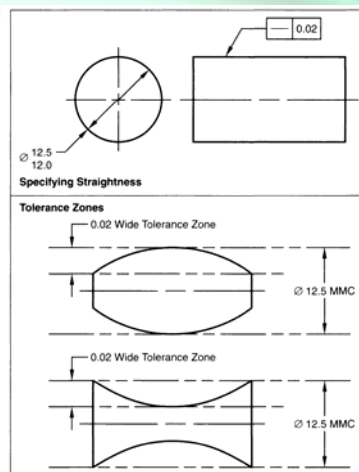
Straightness tolerance applied to a surface
